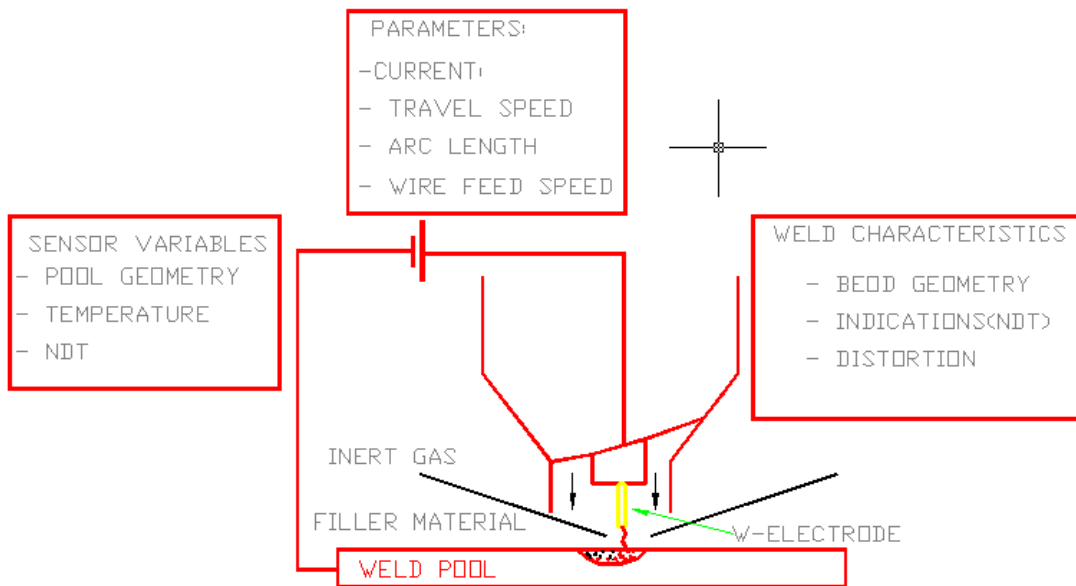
Principle of Tungsten Inert Gas (TIG) welding.
